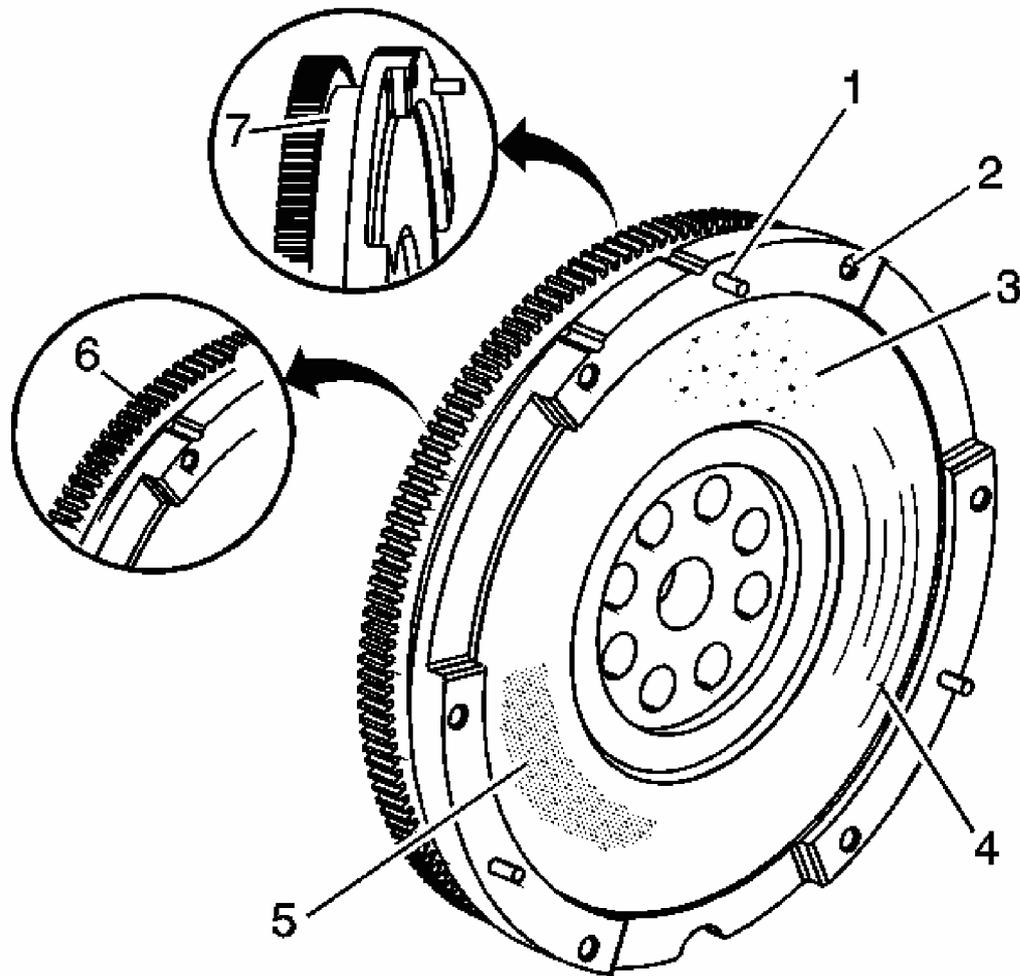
Inspecting Manual Transmission Engine Flywheel For Damage
